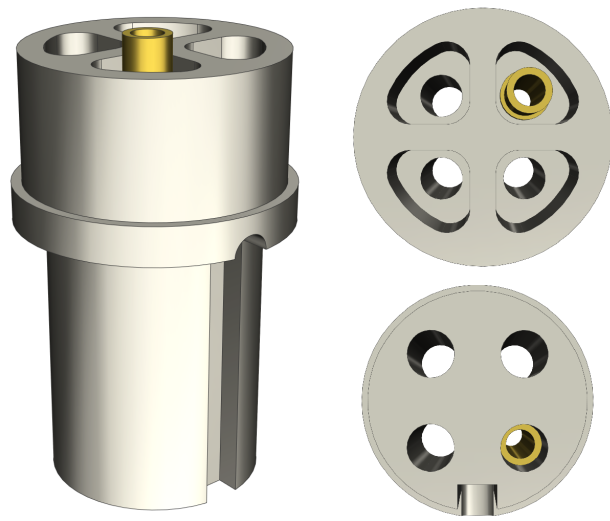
Plug as cad model with pin in gold, left the isometric view, top view from electrode side, bottom view from feedthrough side
